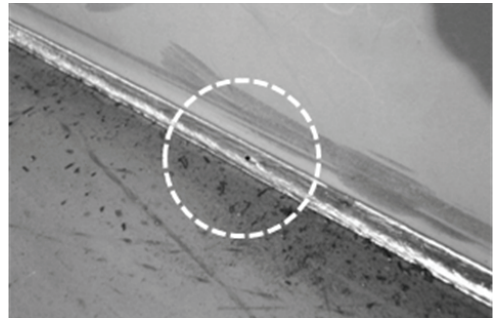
Photo of blow hole occurred during arc welding process
